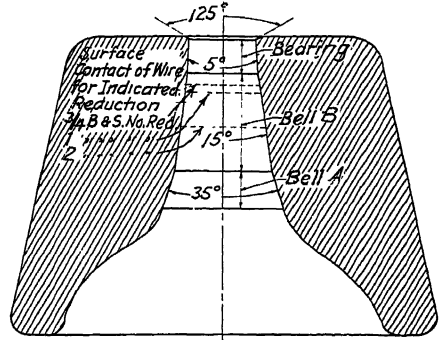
TYPICAL CHILLED IRON DIE OF PROPER DESIGN WHICH WILL NOT PRODUCE CHECK MARKS EVEN WHEN OLD.
